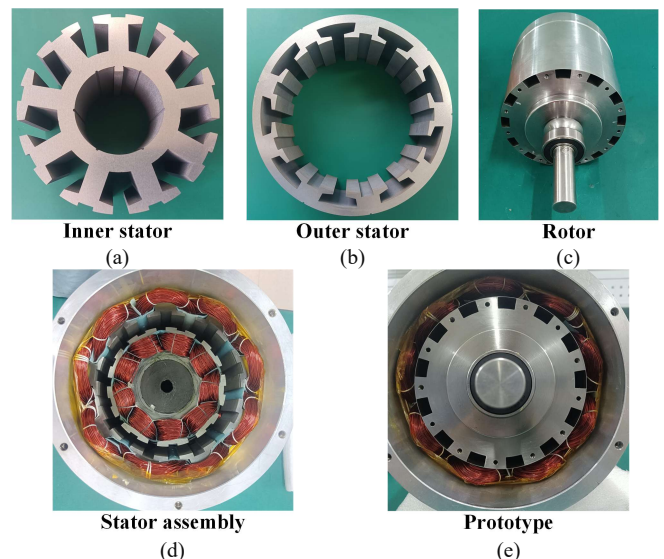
The prototype of the proposed DS-VPMM. (a) Inner stator. (b) Outer stator. (c) Rotor. (d) Stator assembly. (e) Prototype.
